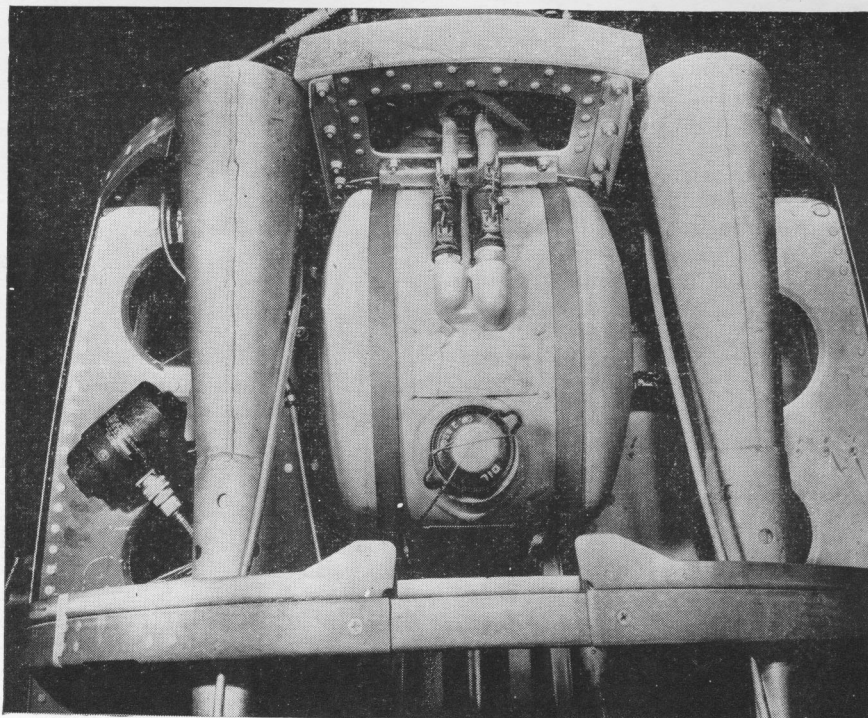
The propeller reduction gearbox has a separate lubrication system with an oil tank mounted just behind the gearbox between .50-caliber machine guns.
